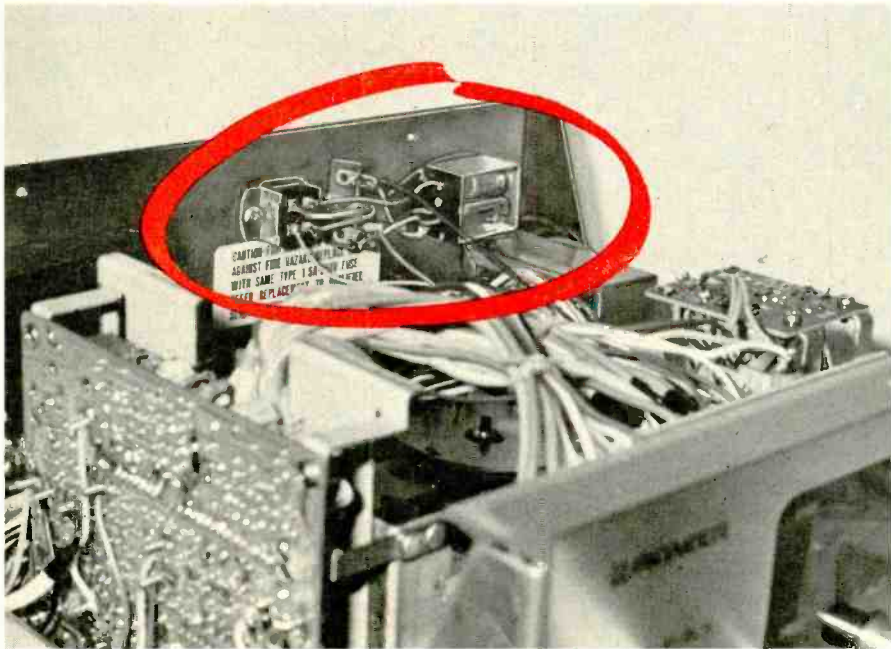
Interior view of author's prototype reveals printed circuit board mounting details.
